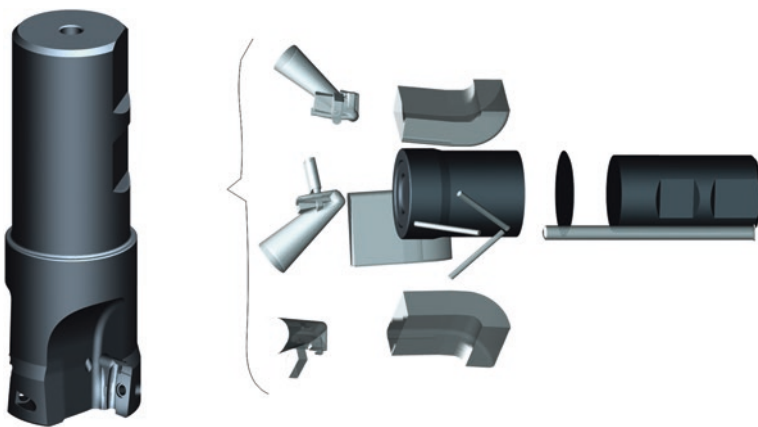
Milling head (*left*) assembled from parametric parts (*right*). Courtesy of Sandvik Coromant AB
